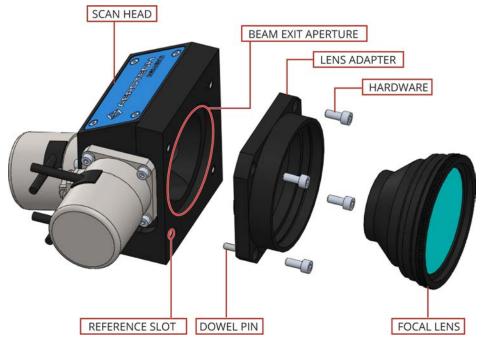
Assembly of Focal Lens to Scan Head (AGV-HP(O))
